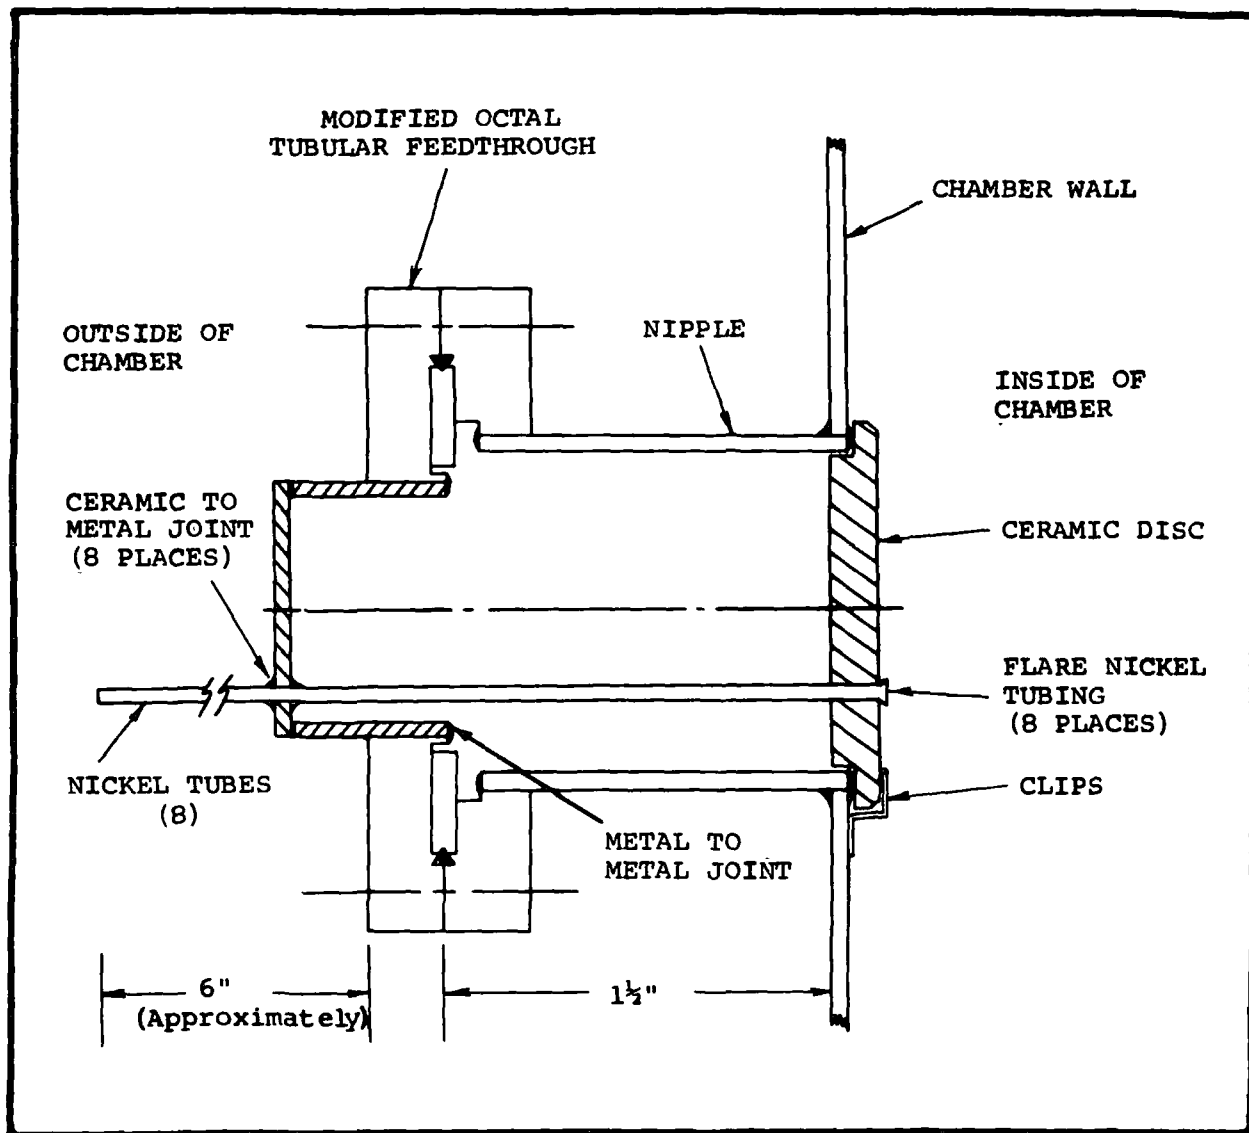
Details of Thermocouple Feedthrough Flange
